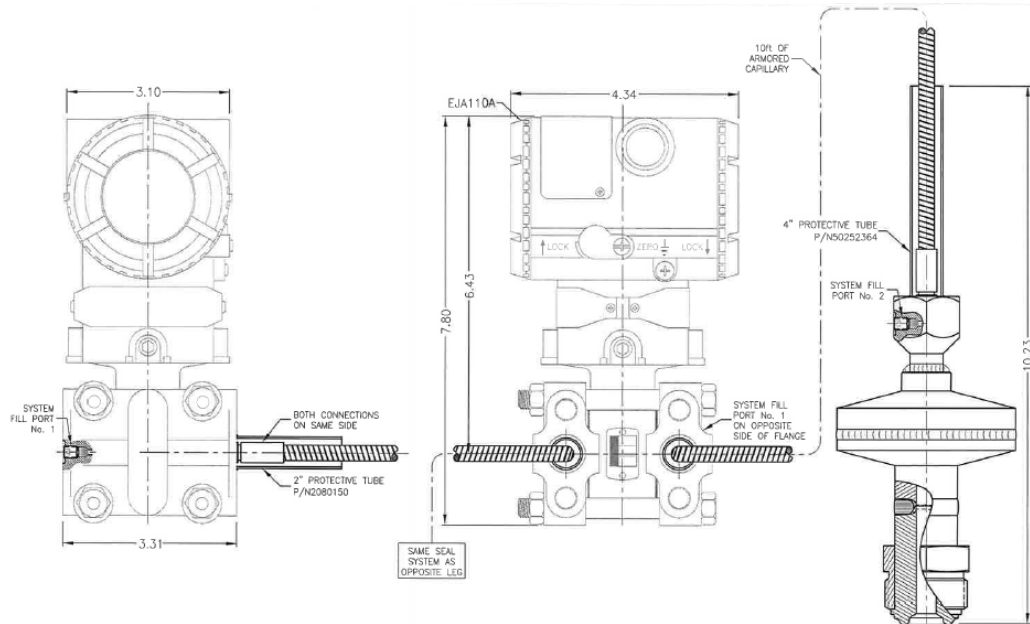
$\Delta P$  gauge Assembly for Level Measurement in the Dump Tank and Expansion Tank.
